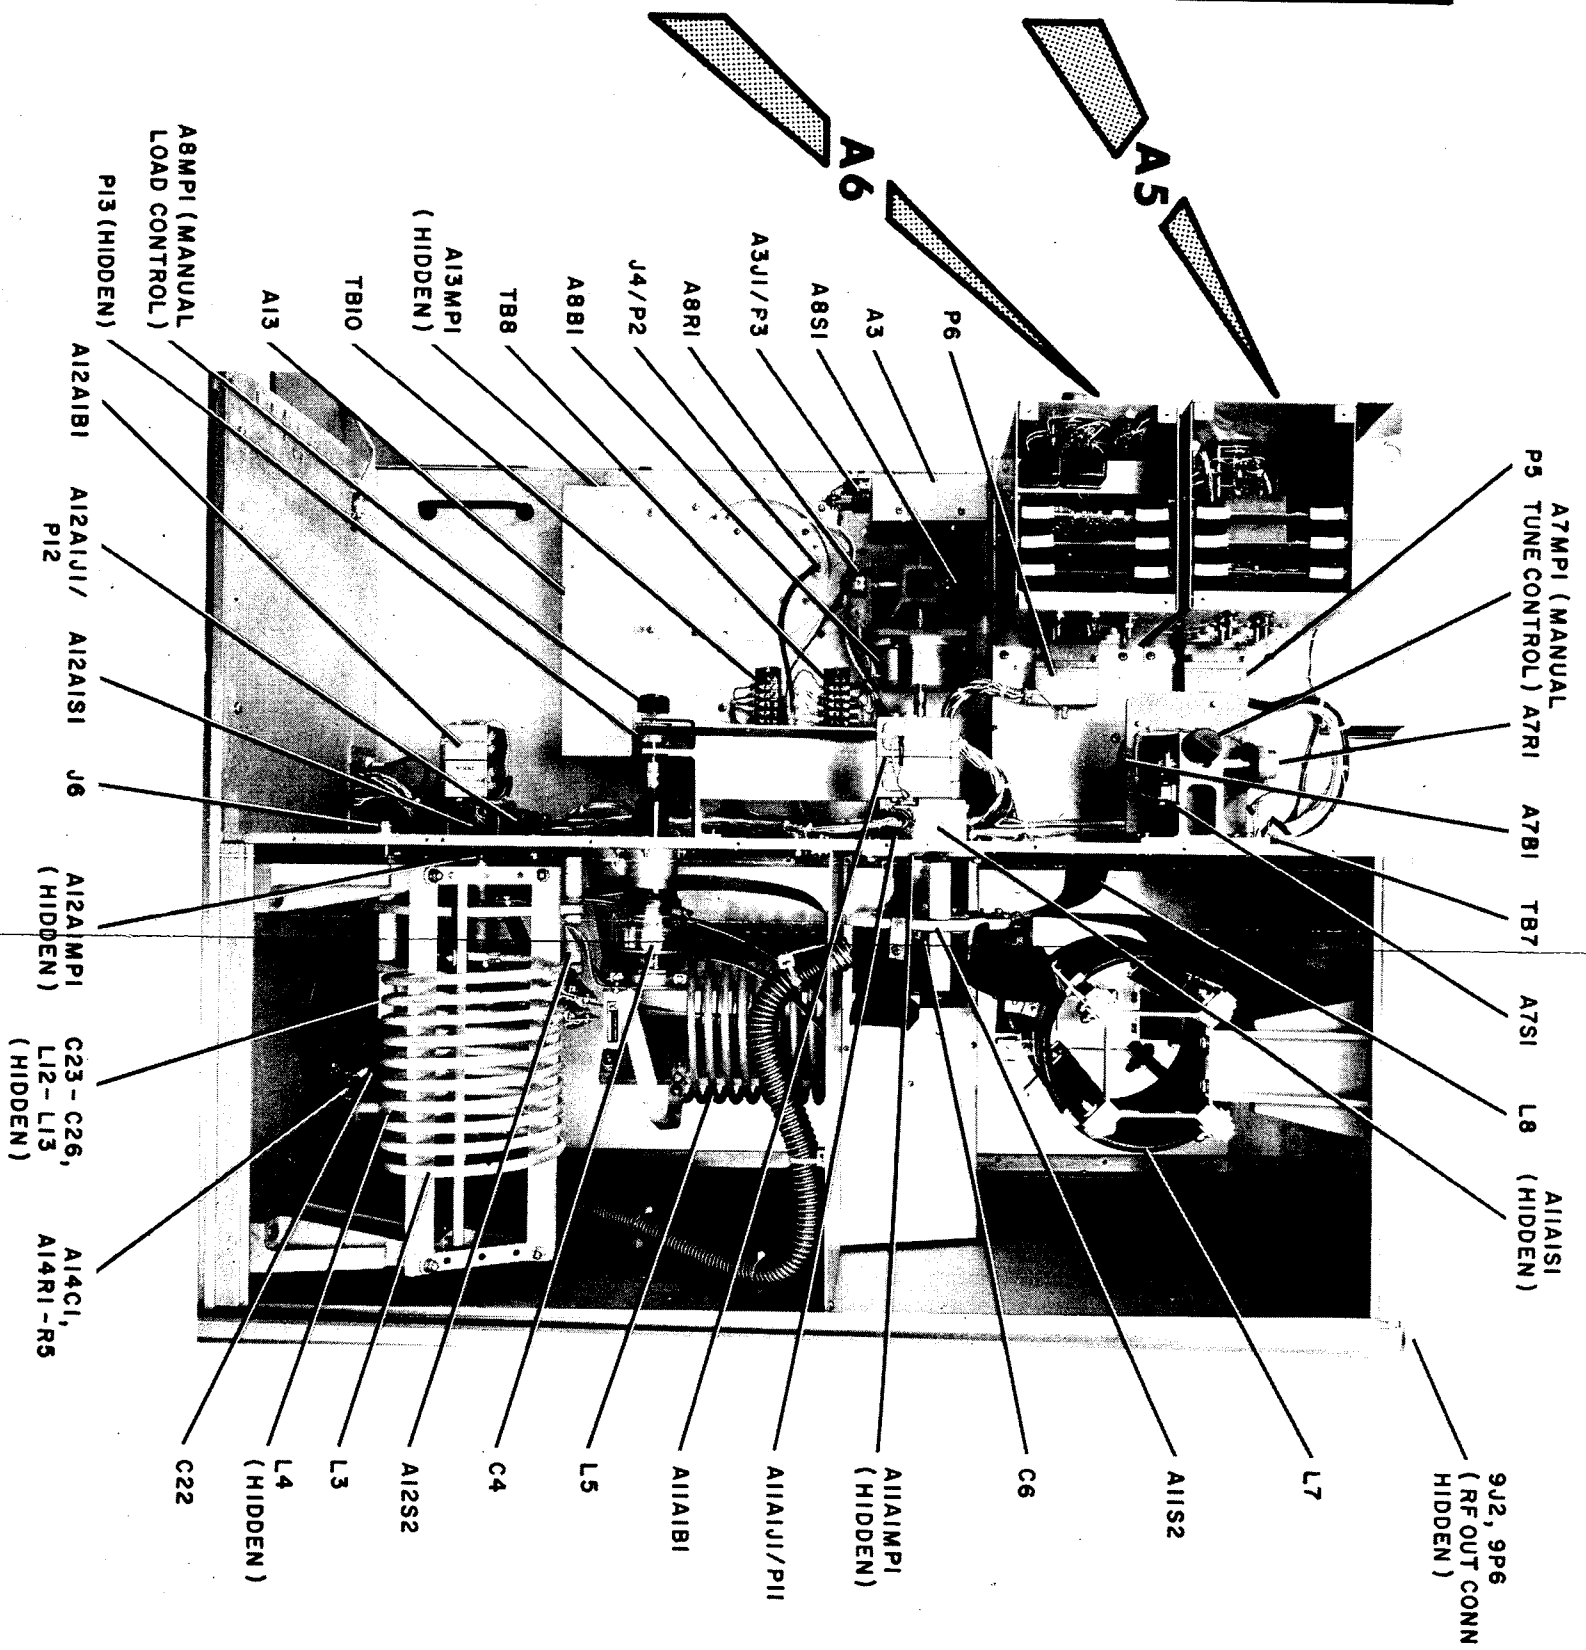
10 KW PA, Chassis Assembly 9A1, Right Side View, Component Locations
